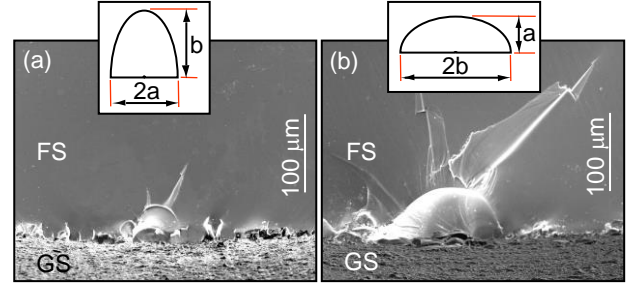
Typical fracture origins corresponding to: (a) novel, and (b) conventional processes. (FS: fracture surface; GS: ground surface)
